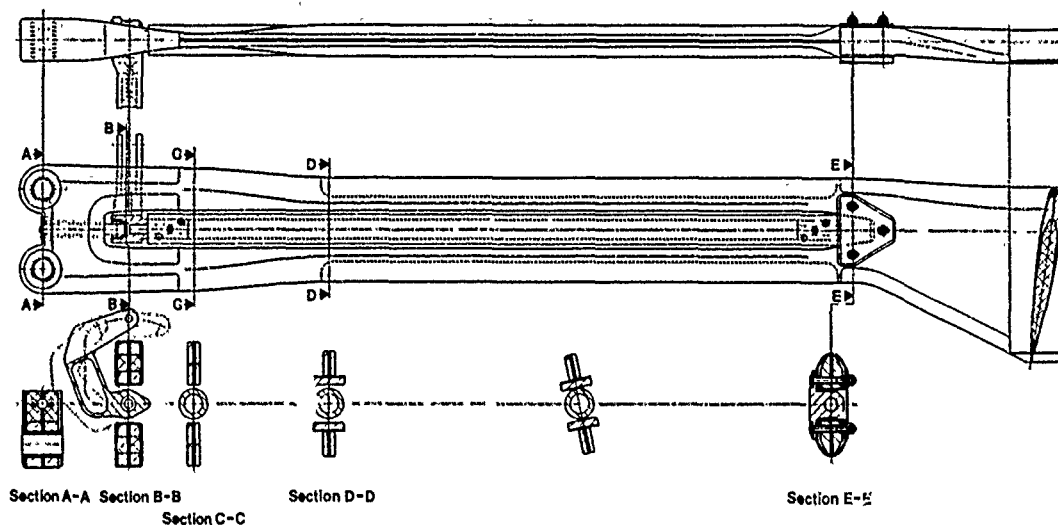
Composite bearingless main rotor design with flexural double beam element and control rod
